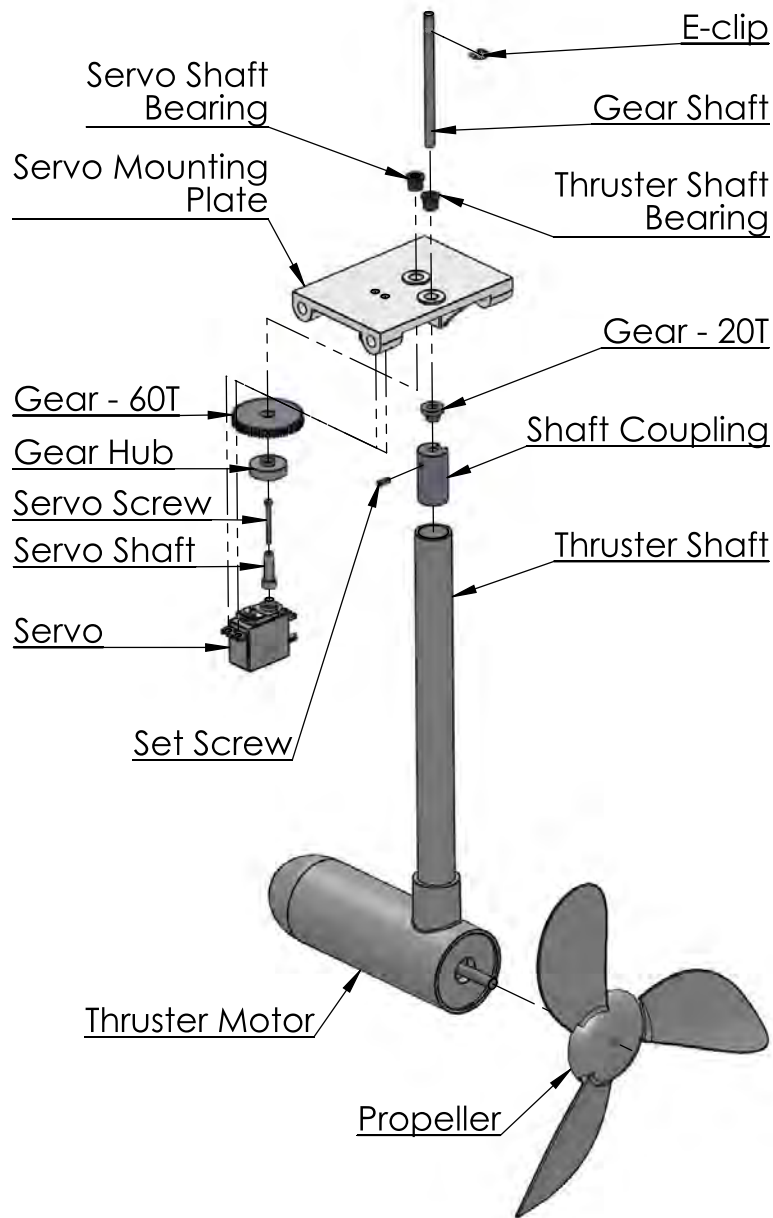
Kayak servo assembly. The thruster is rotated with a servo-motor through a 1:3 gear ratio. The thruster shaft is connected to the 20-tooth gear with a shaft coupling and gear shaft. The Servo Mounting Plate is 3D-printed and contains mounting holes for the servo, the servo gear shaft bearing, and the thruster gear shaft bearing.
